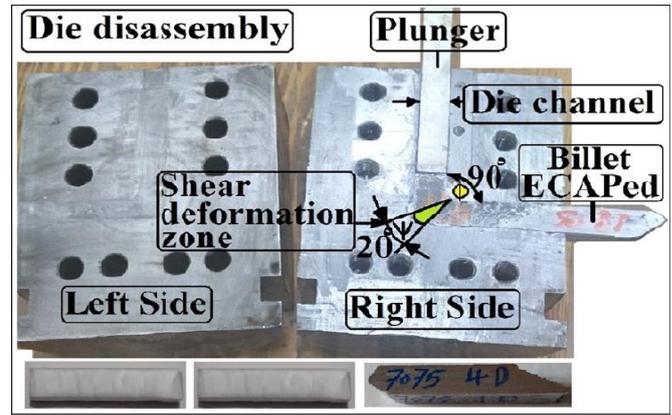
The die and disassembly of sample to expose the die from the inside and billet before and after ECAP
